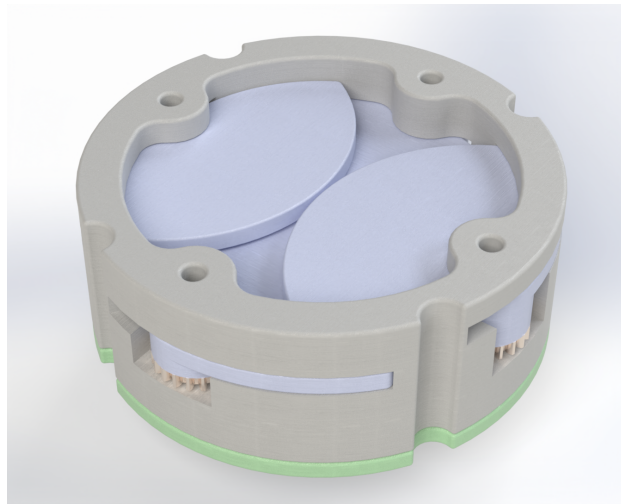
CAD of Air Brakes mechanism with fins retracted.
